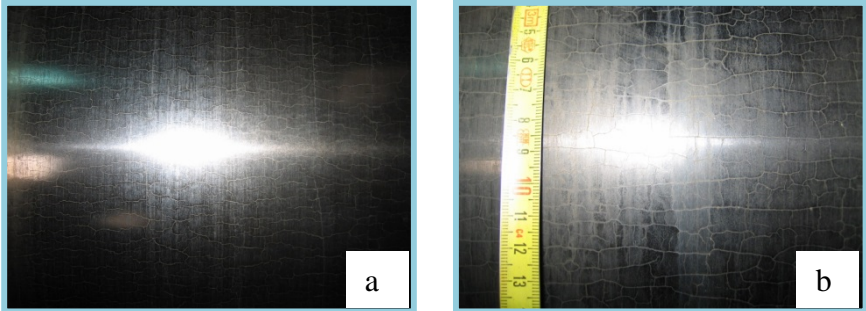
Roll surface (a – Top Roll; b – Bottom Roll).
